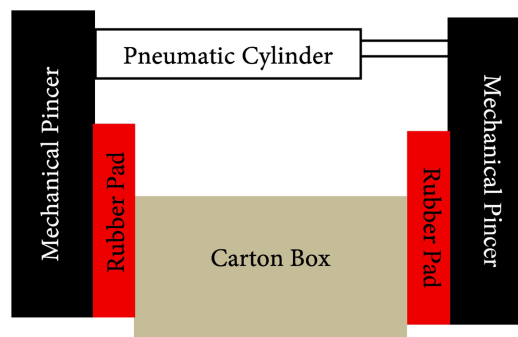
Rubber pad layered between the carton box and mechanical pincer.
